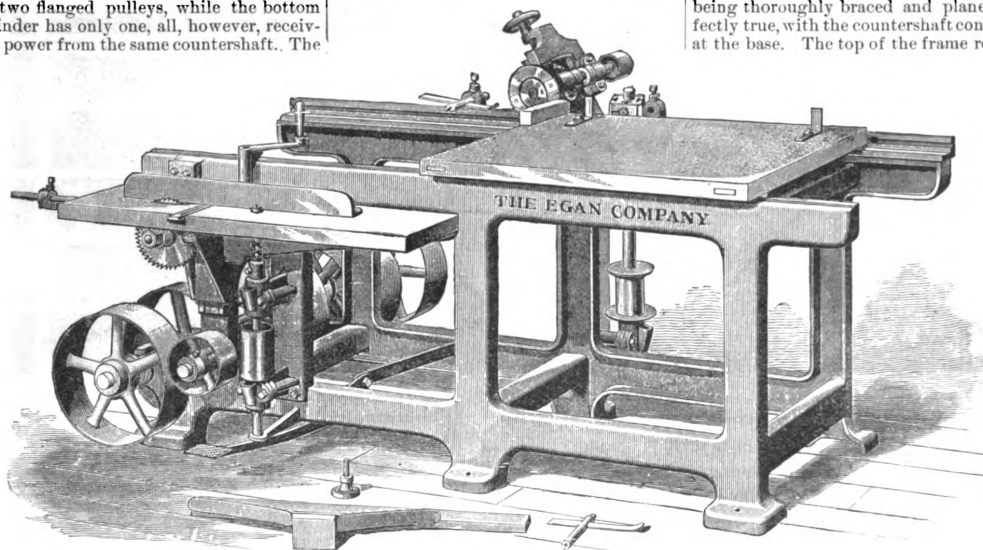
Sash and Blind Jointing, Rabbeting and Finishing Machine, Built by the Egan Company, Cincinnati.
